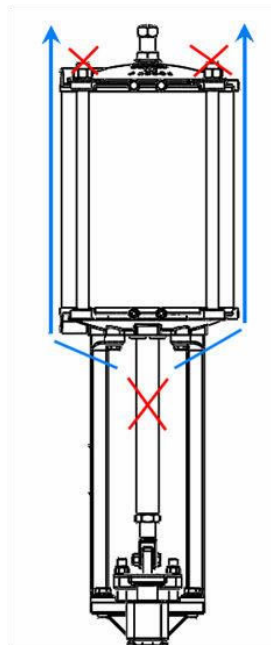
Knife Gate Valve with Pneumatic Cylinder Actuator, Vertical Lifting
